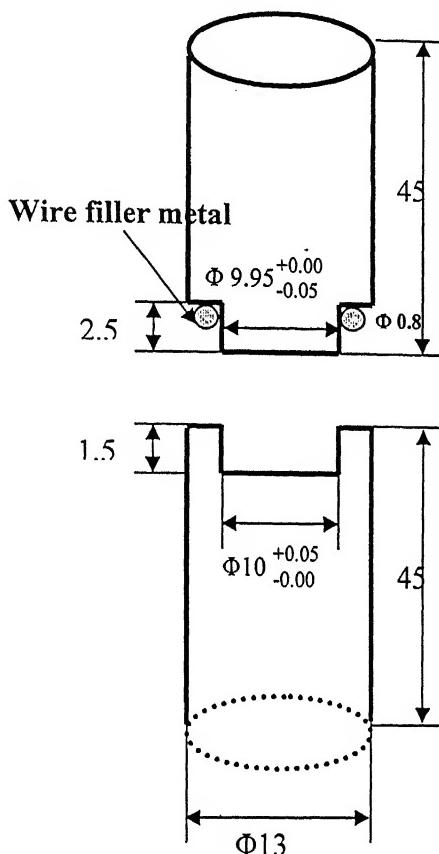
The design of tensile samples TT2S 830 and TT3S 830 with wire as filler metal. Note that design tolerances were applied
